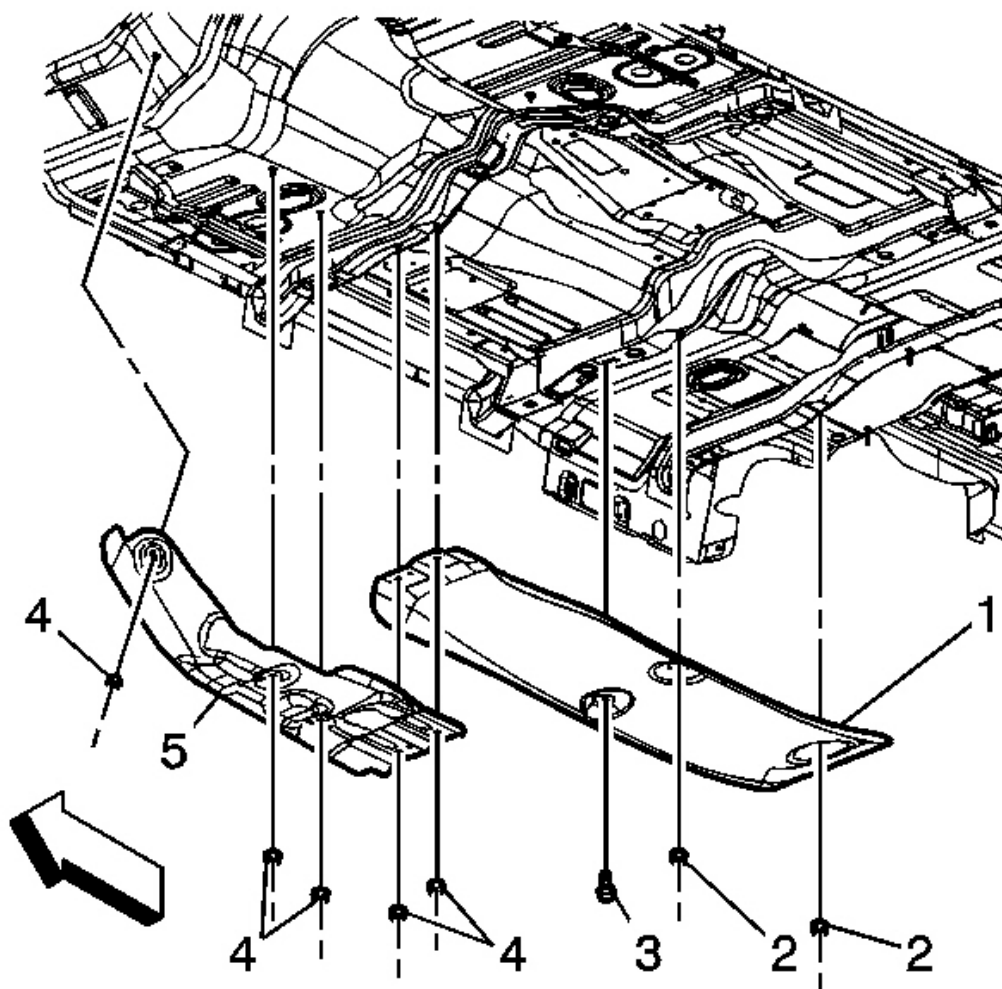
View Of Catalytic Converter Heat Shields & Nuts
